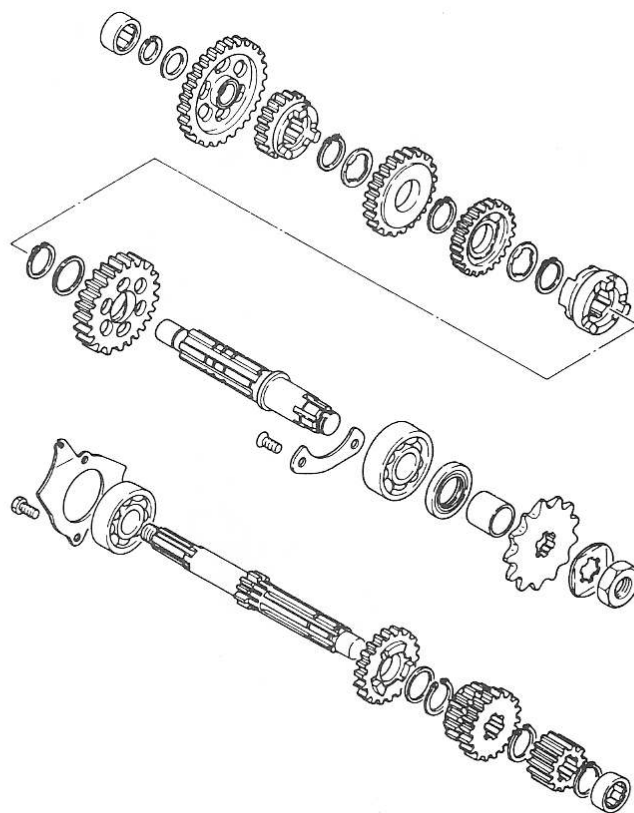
A.31 YT 125/175 transmission shaft components — exploded view (Sec 23)
